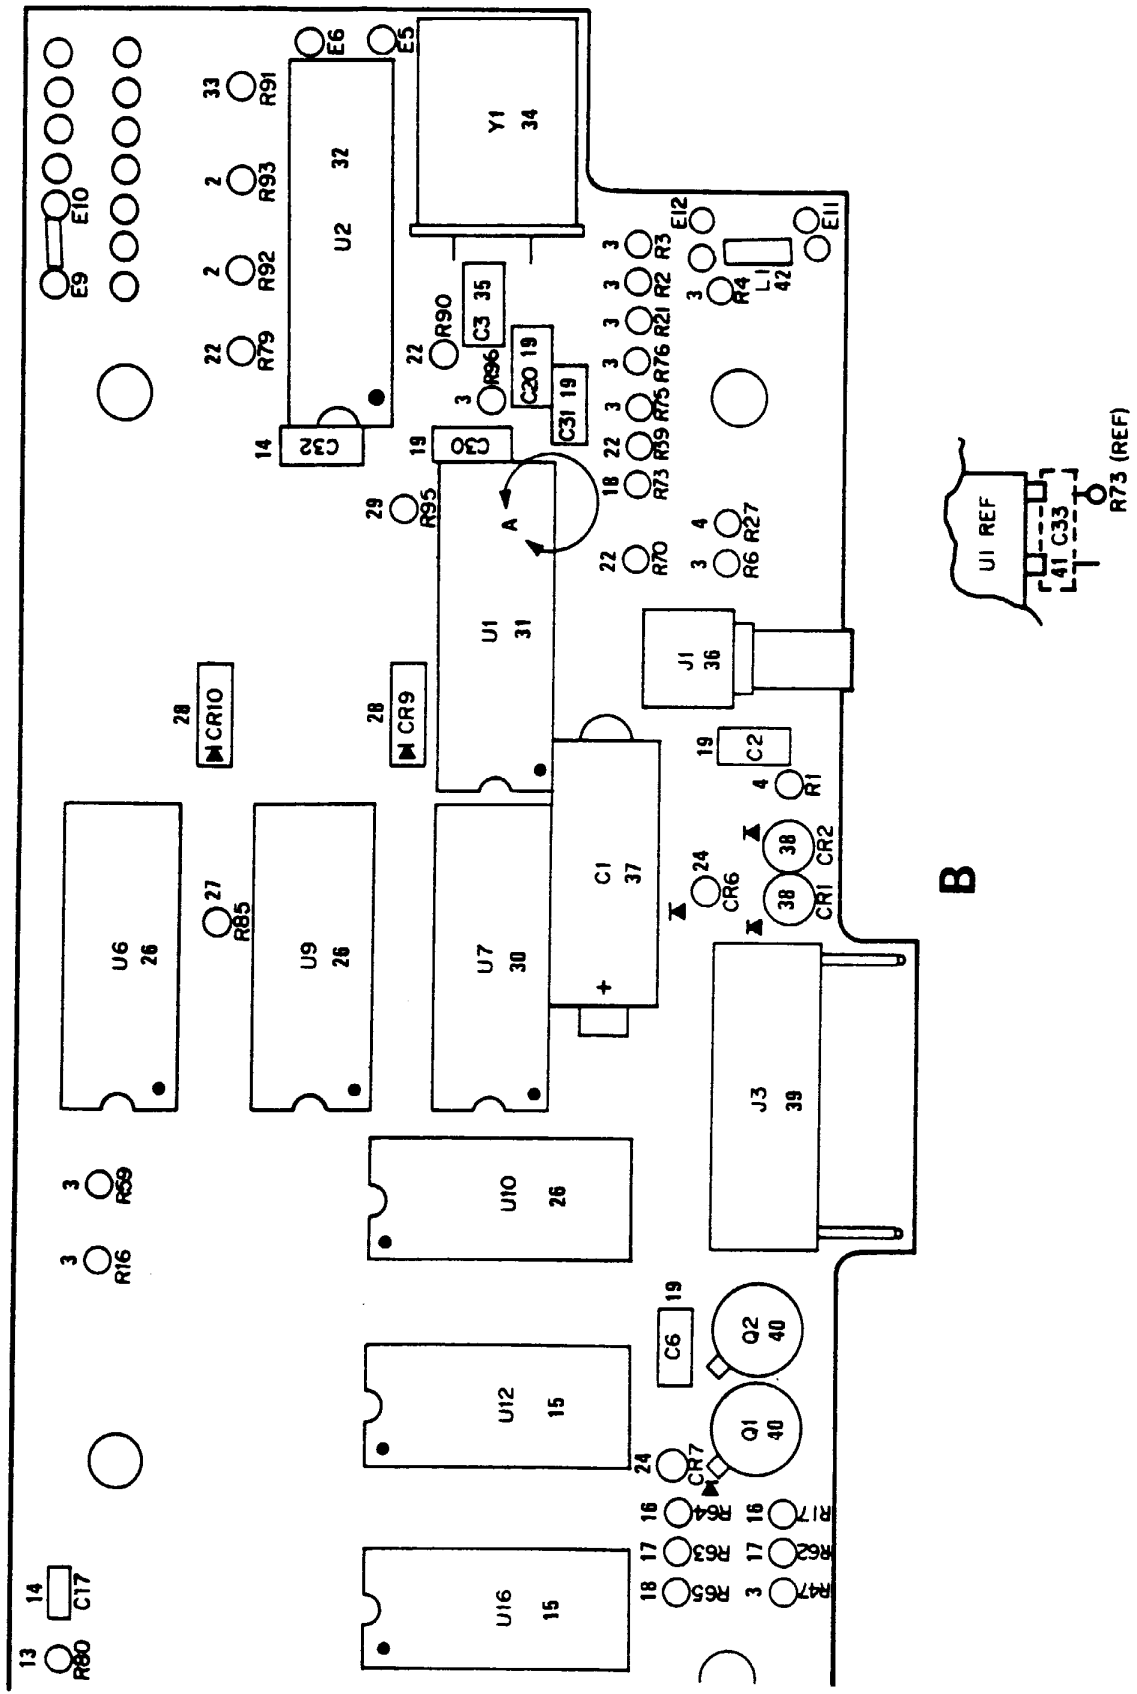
Data Converter - CPU Circuit Card Assembly (Sheet 2 of 2)
